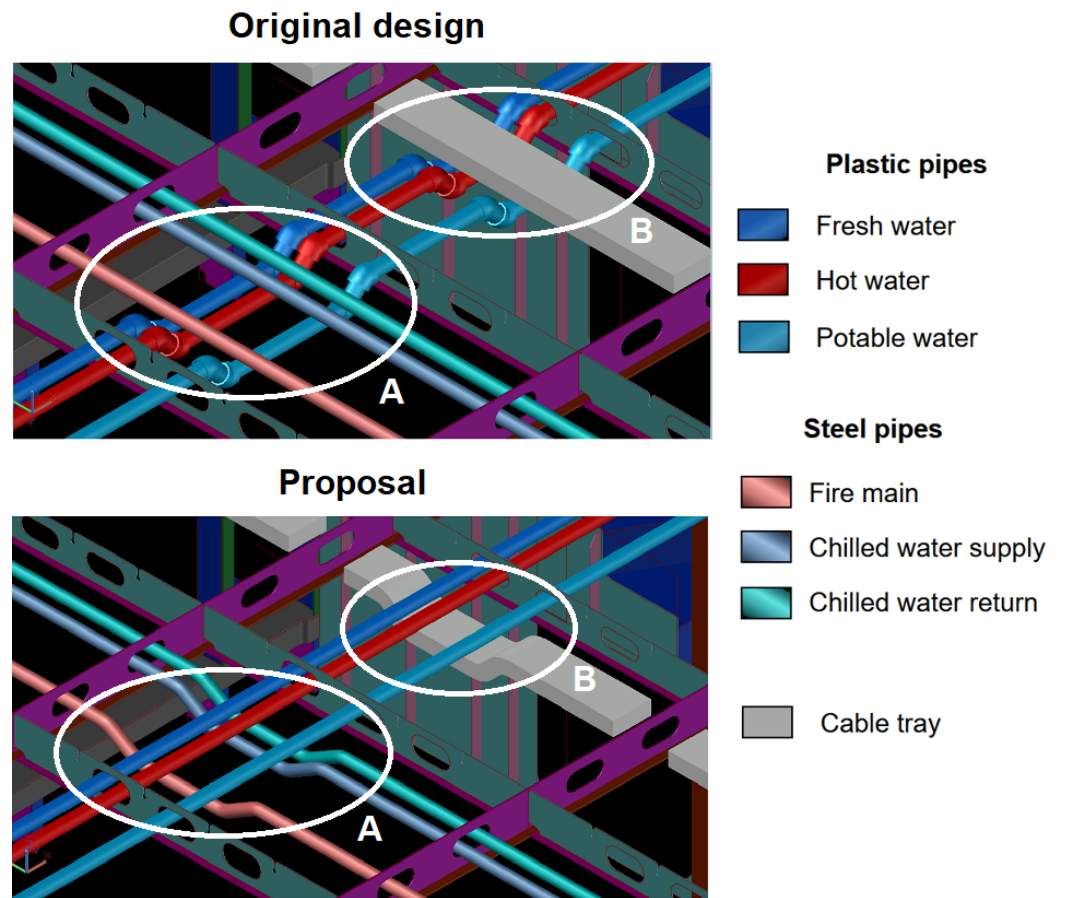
Original 3D model and suggested improvements to 3D modeling of systems. In area A, steel pipes are bent and plastic pipe elbows are avoided. In area B, plastic pipe elbows are avoided with the redirection of the cable tray.
